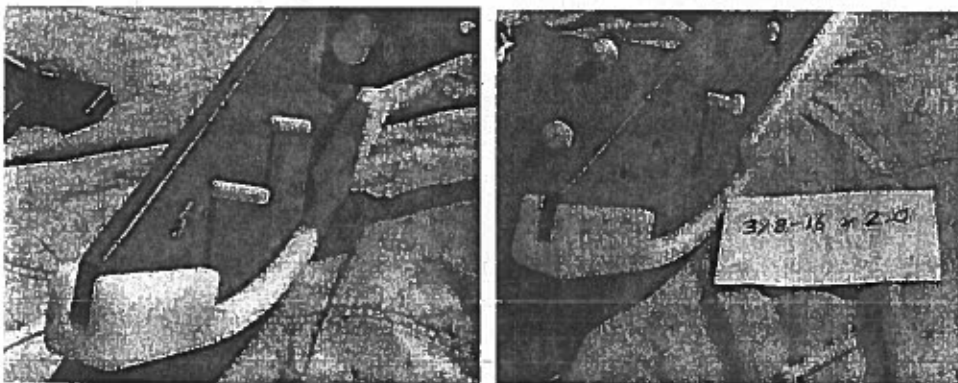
The yoke is secured to the skids using the indicated bolts, which are 3/8-16 x 2.0" nylon. These screw into threaded inserts in the middle plate.
